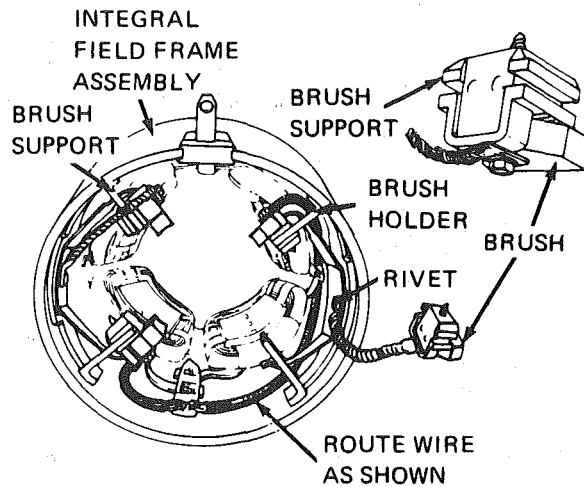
Starter Motor Disassembly, Test and Reassembly 2 of 6
